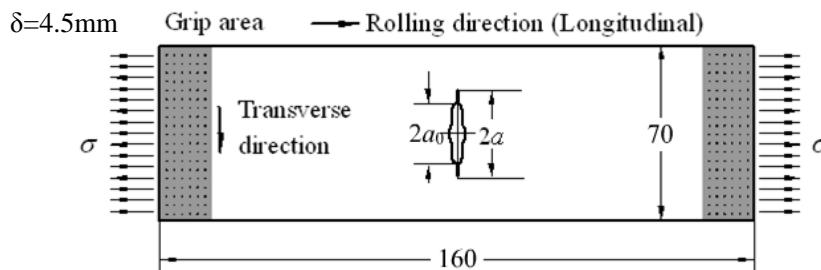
M(T) specimens principal dimensions (Unit: mm)
